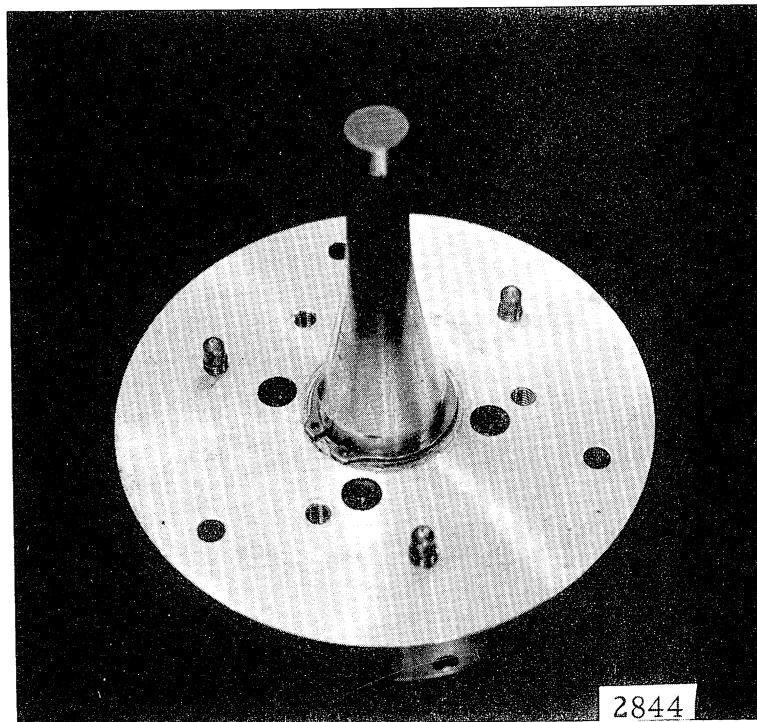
Bottom of Adjustable Plate Showing Snap Ring Attachment
